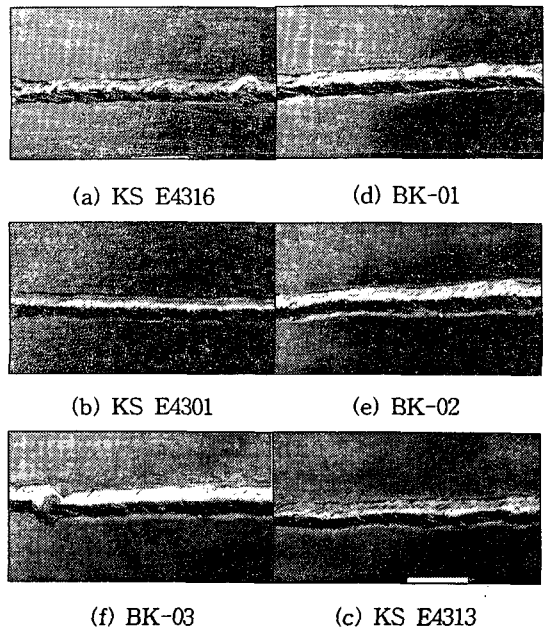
Appearance of bead in various welding electrodes when underwater wet welding.
